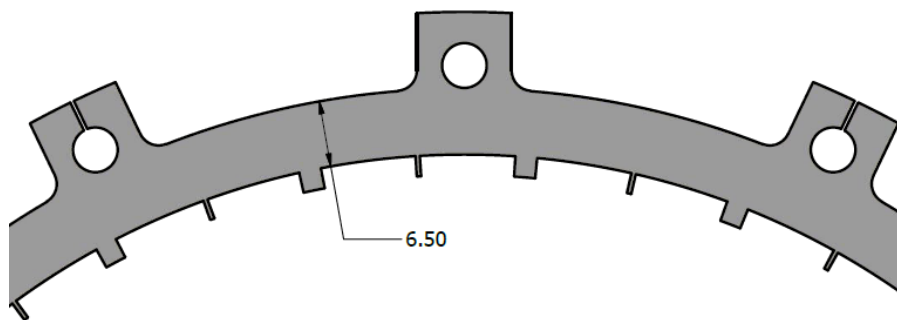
Drawing and dimensions of PM carrier yoke showing spacers used for magnet positioning
